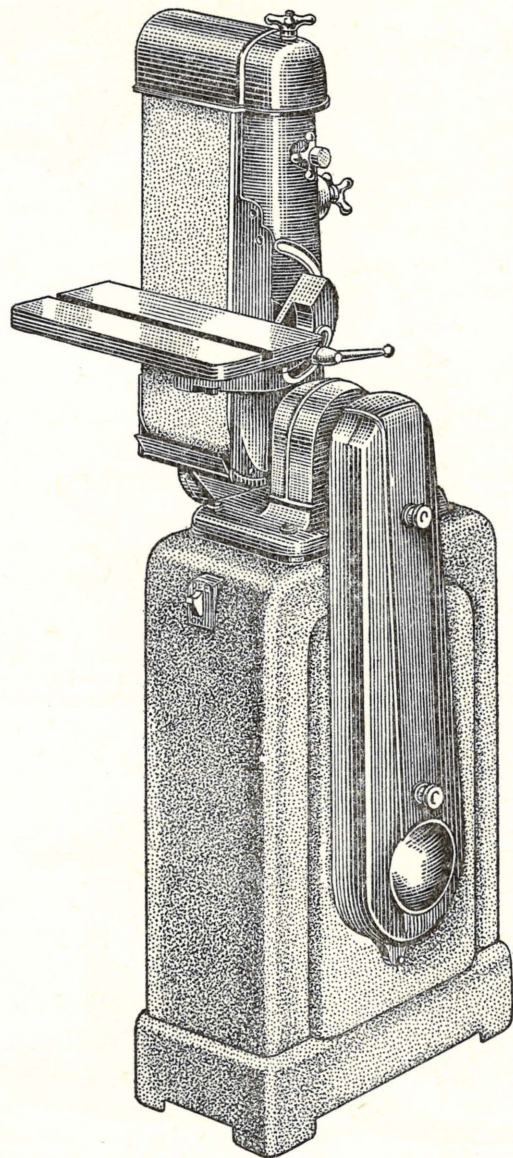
The belt sander may be used for sanding straight surfaces or ends and edges
